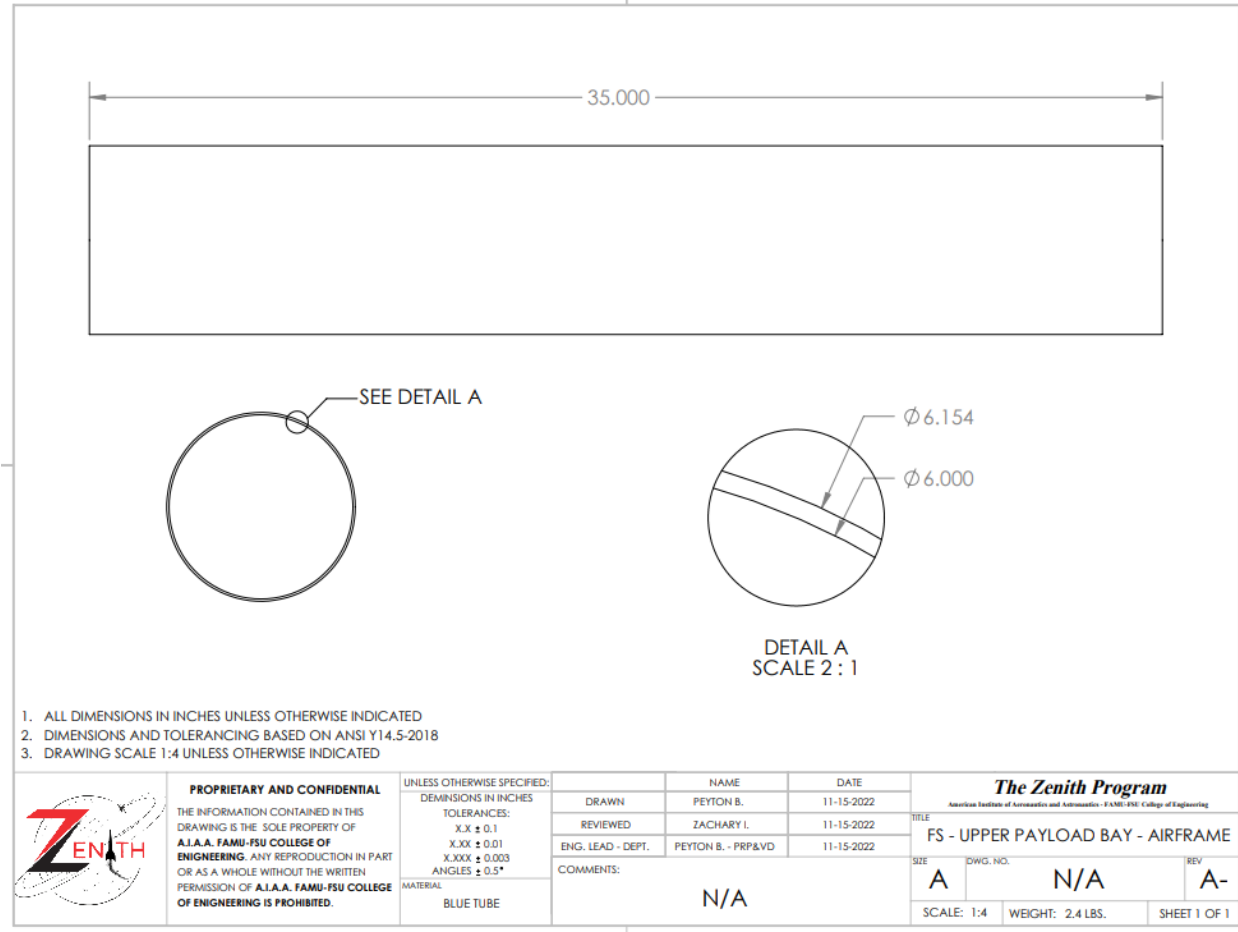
Upper Payload Bay Airframe CAD Drawing
